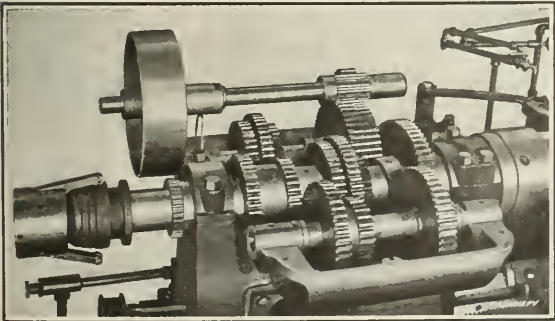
Arrangement of Gears in Head—Cover removed to show Mechanism
